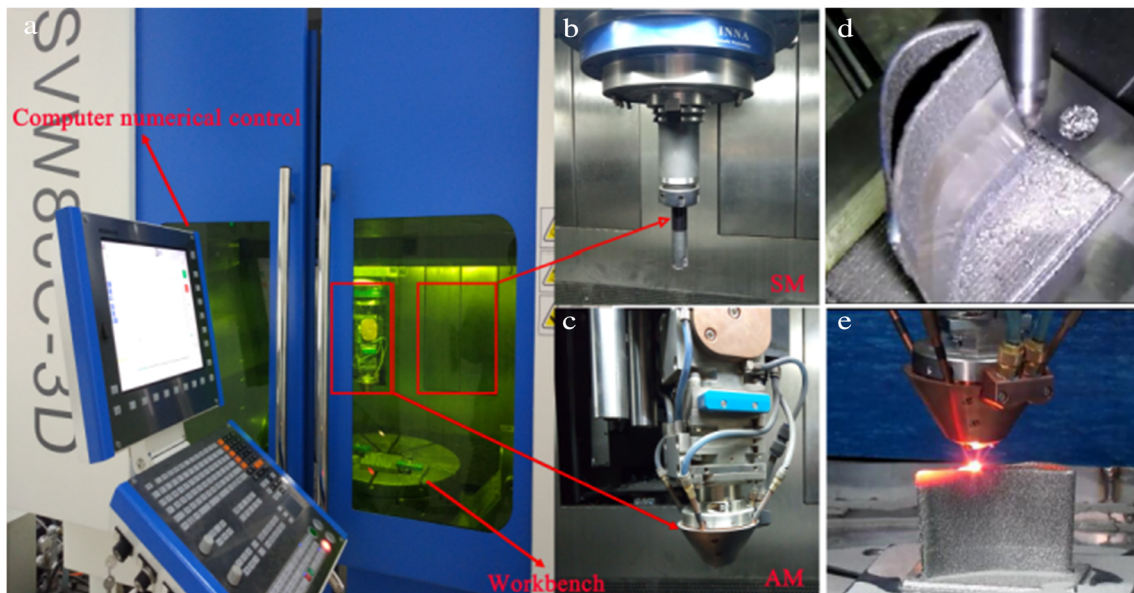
a HASP machine (SVW80C-3D), with b CNC milling head, c DED head, d example of the CNC milling process, e example of the additive deposition process
